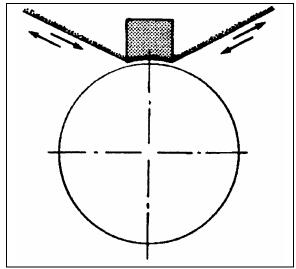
IMPROPER GRINDING TECHNIQUE
